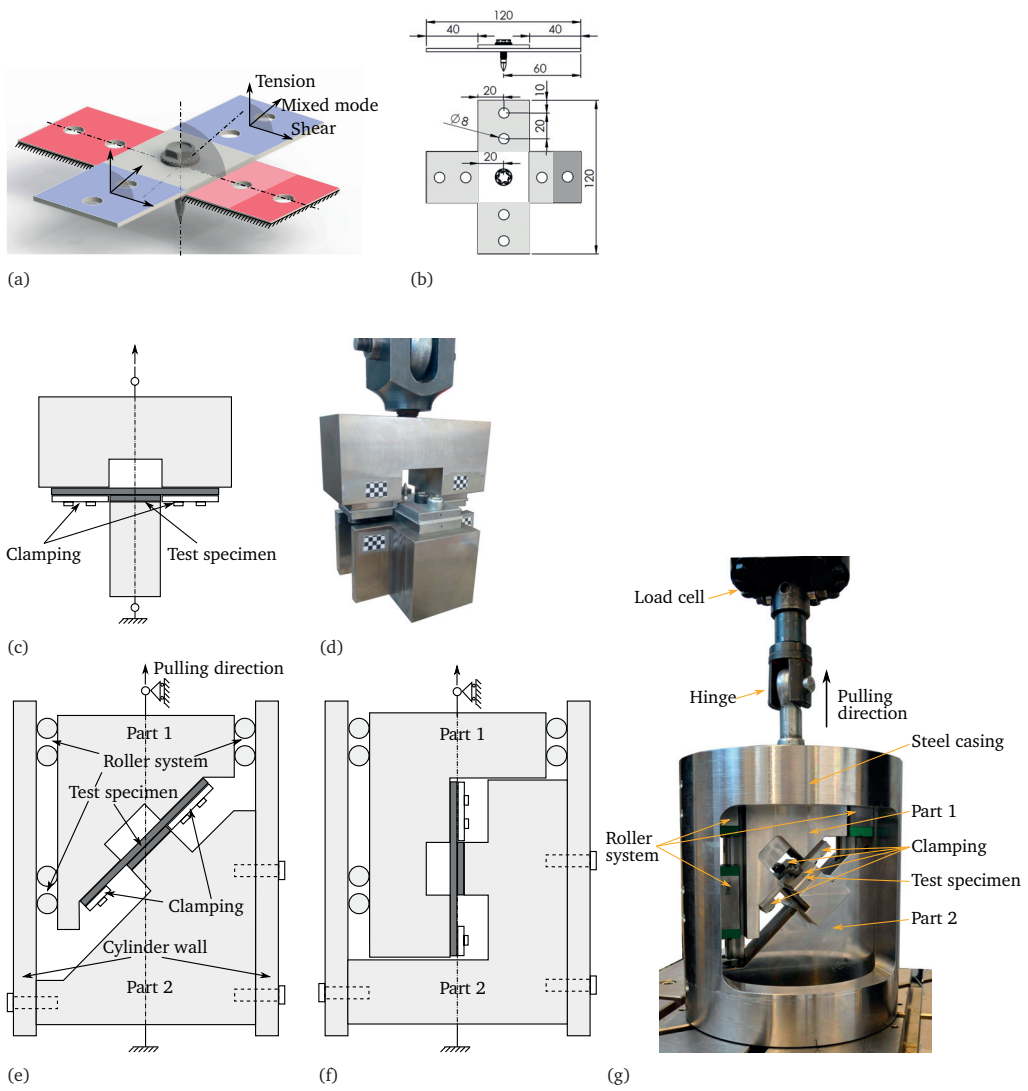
Illustrations of the set-ups in the cross tests. (a) Principle of the cross tests. (b) Drawing of the cross test specimen. (c) Principle drawing of the tension set-up. (d) Picture of the tension set-up. (e) Principle drawing of the mixed-mode set-up. (f) Principle drawing of the shear set-up. (g) Picture of the mixed mode set-up.
